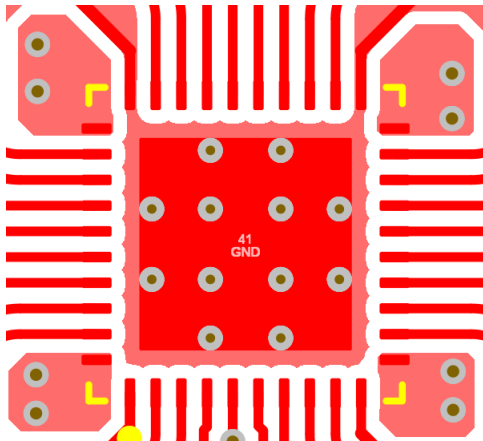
PCB Layout Example for LMK1D2106L, Top Layer
